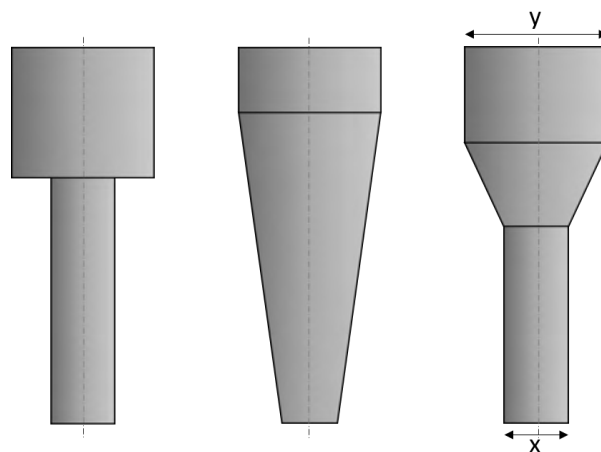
Common sonotrode shapes for ultrasonic welding
